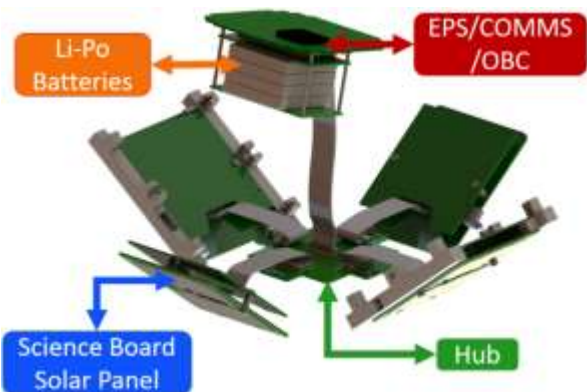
MakerSat-1 showing the EPS/COMMS/OBC/Batteries assembly, four science board/solar panel assemblies, and the Hub assembly, folded together like origami.
